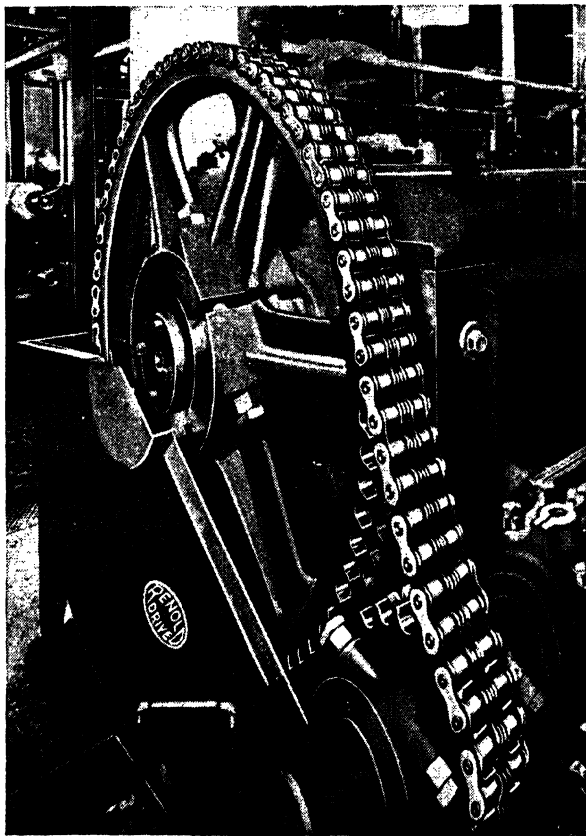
100 h.p. Renold Chain Drive 86.5 r.p.m. to 22.2 r.p.m. at Short Centres.
